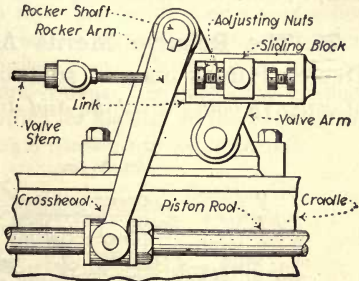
Mechanism For Outside Adjustment Of Lost Motion In Duplex-Pump Valve Gear.
